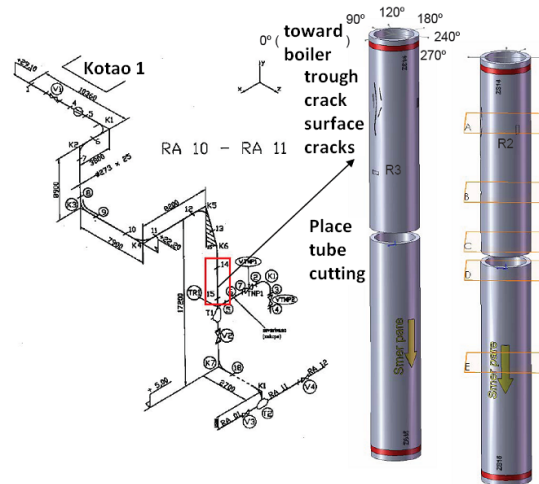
Scheme of measurement tests (dimensional inspection of the damaged steam line part).
